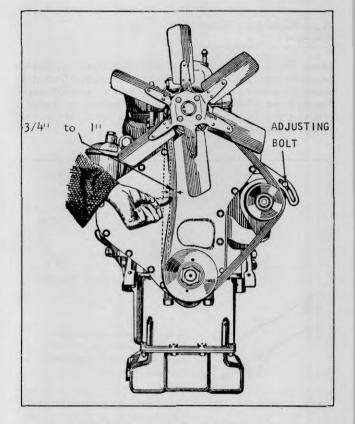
Belt Deflection Check BEARING DAMAGE. CONVERSELY, BELTS ADJUSTED TOO LOOSE WILL RESULT IN BELT WEAR AND HIGH ENGINE TEMPERATURE DUE TO BELT SLIP-PAGE.
